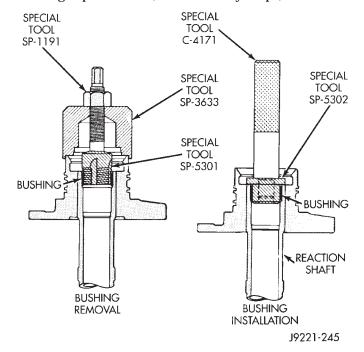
Reaction Shaft Bushing Replacement—46RH
